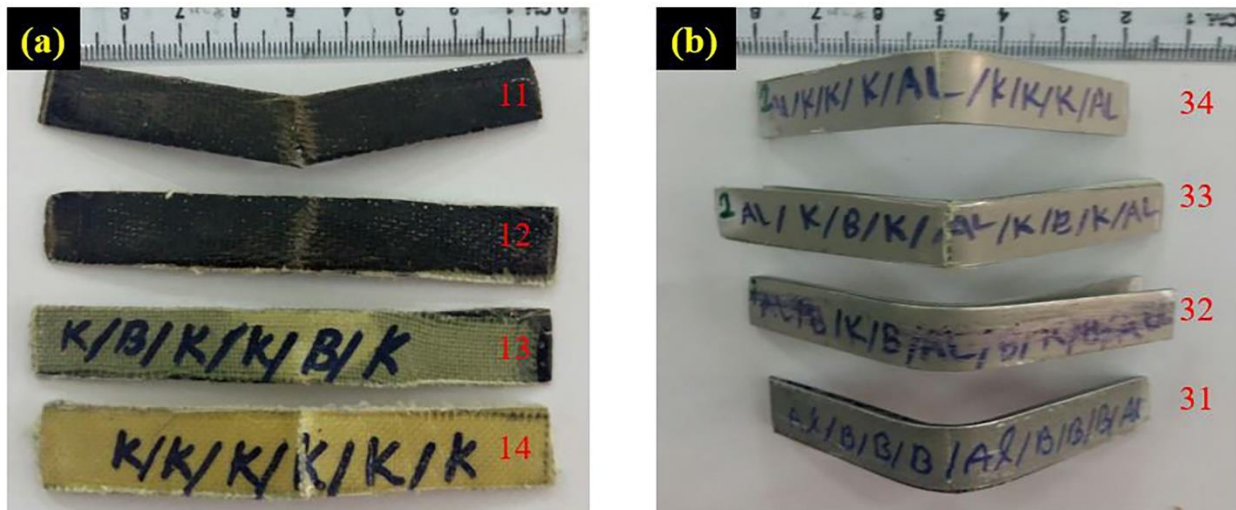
The fracture surface of (a) polymer composites, (b) Al FMLs.
